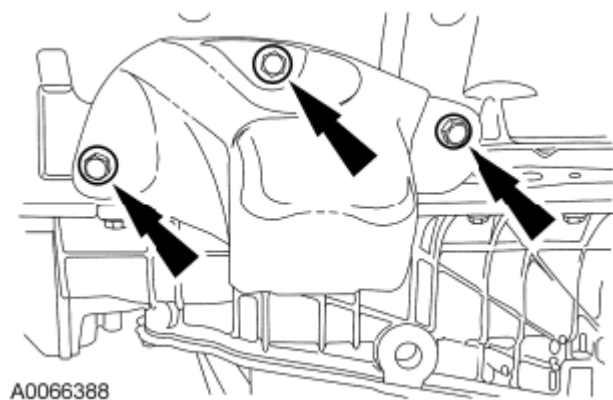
Locating RH And LH Insulator Bolts And Brackets
